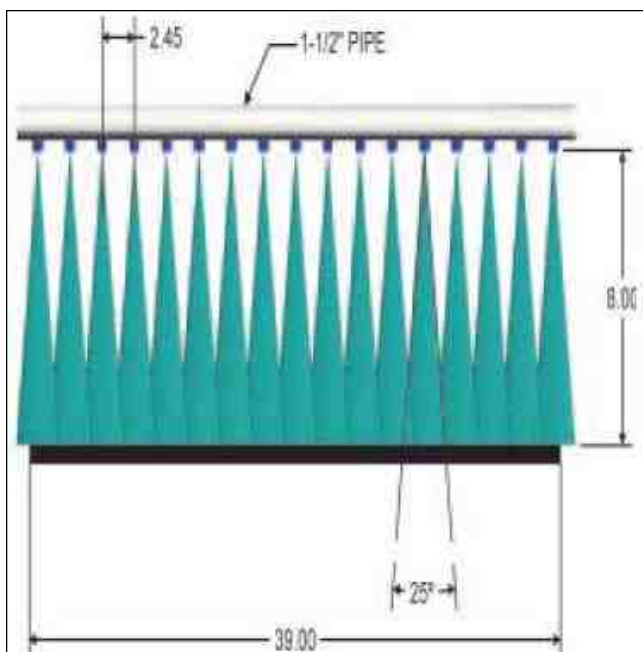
Flat spray nozzle manifold illustration using a 25° spray angle (Courtesy of Lechler, Inc., St. Charles, IL).
